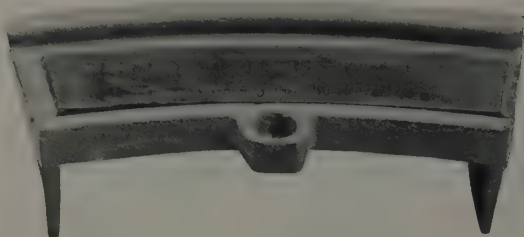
Susemihl Side Bearing for Freight Car Trucks, with Top Removed.
